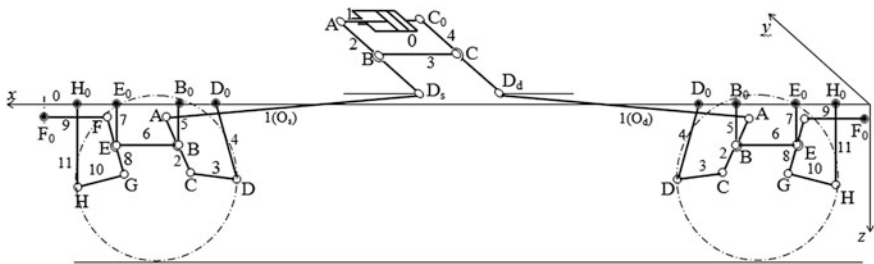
The kinematic scheme of a braking mechanism on a two-axle railway carriage
